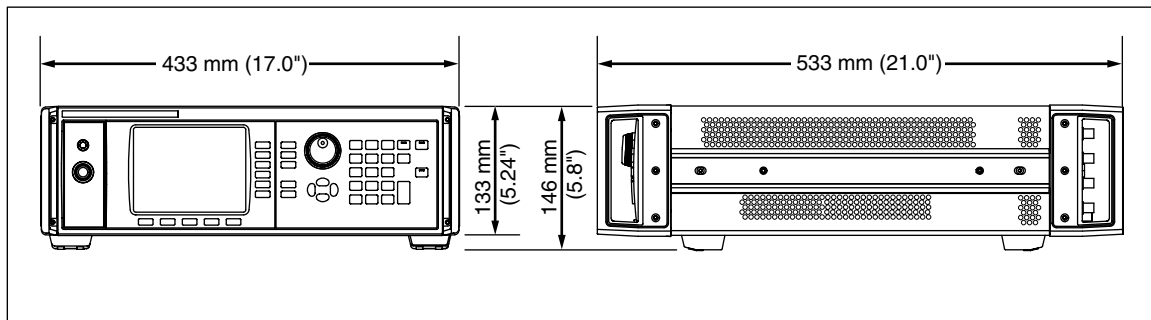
9640A RF Reference Source – Dimensional Outline Drawing
